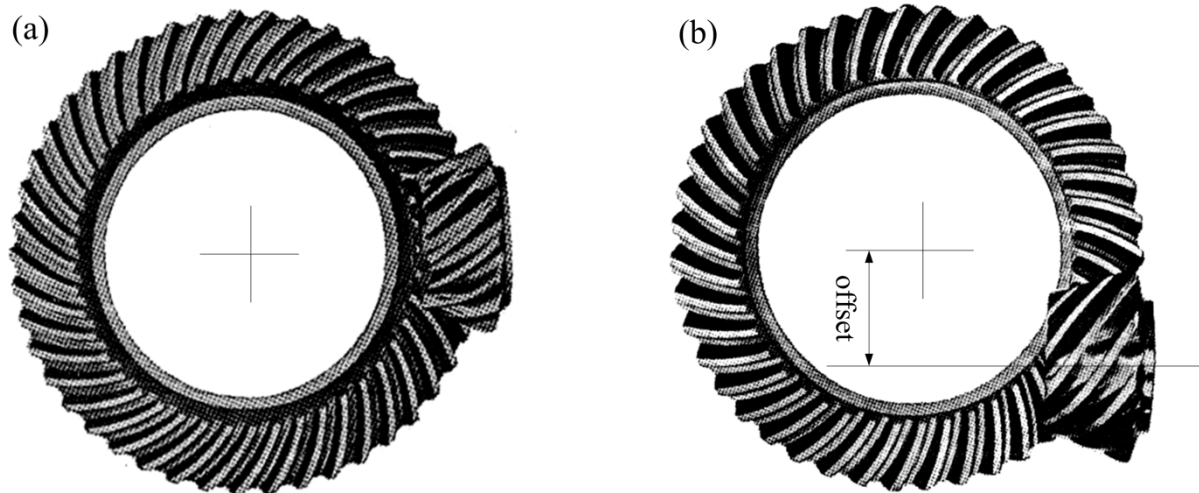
Gear with perpendicular axes, (a) Spiral bevel gears, (b) hypoid gears [1].
